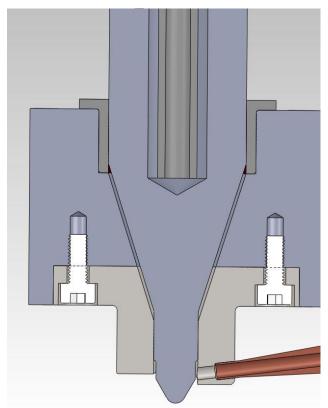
Cross section view of the Probe, Shoulder Holder, Shoulder and Wire Guide
